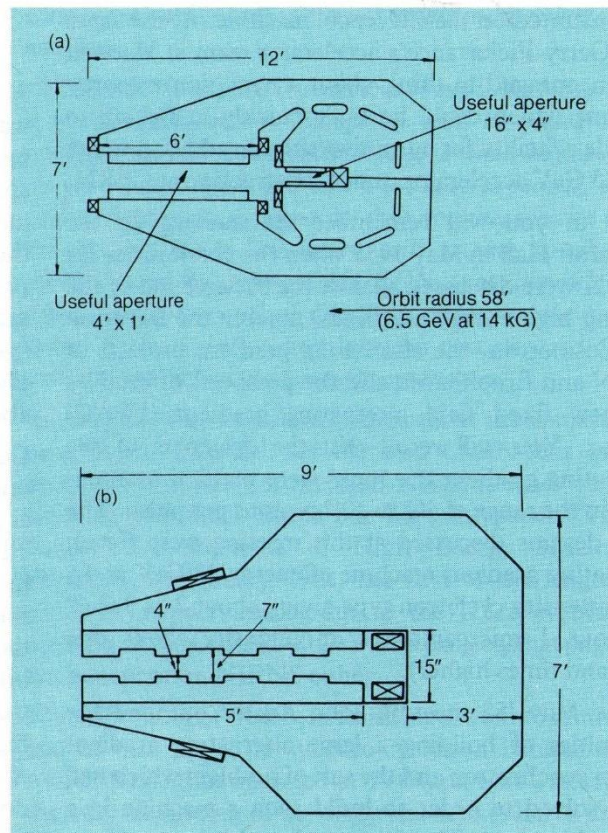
Early magnet designs for a) a double magnet synchrotron and b) a spiral ridge synchrotron presented to the Cockcroft Hall meeting in December 1955. These designs correspond to the machine types 8 and 9 in Table I.
